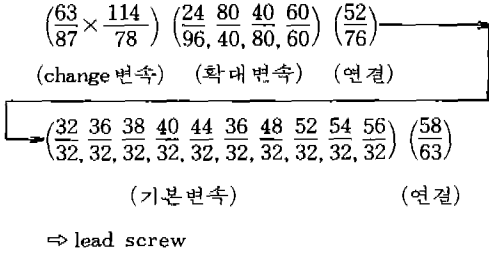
Gear trains for cutting meter screw (KOHEMA-860 lathe)
